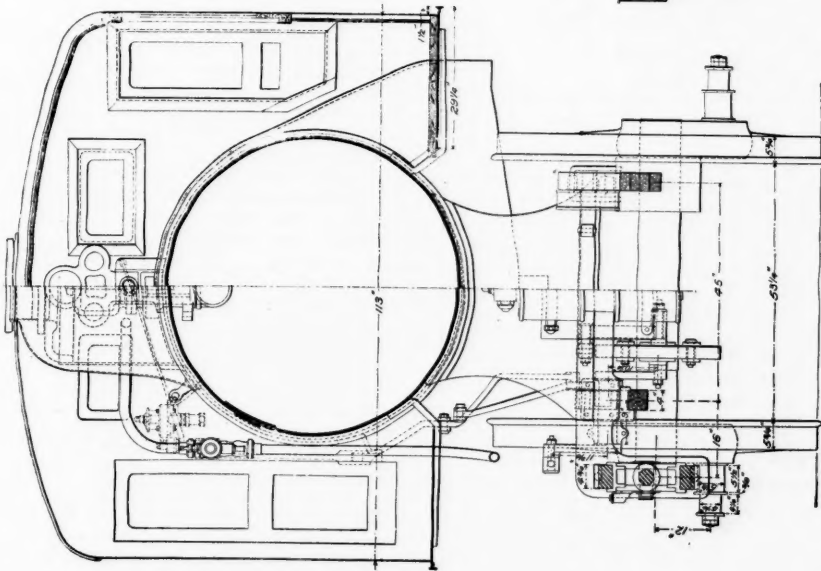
Half Cross-Section in Front of Dome Looking Backward, and Half Cross-Section through Cab Looking Backward.
